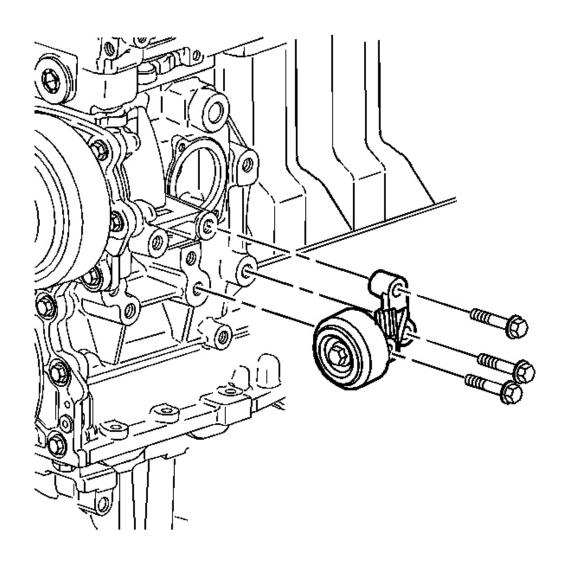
View Of Drive Belt Idler Pulley Courtesy of GENERAL MOTORS CORP.
